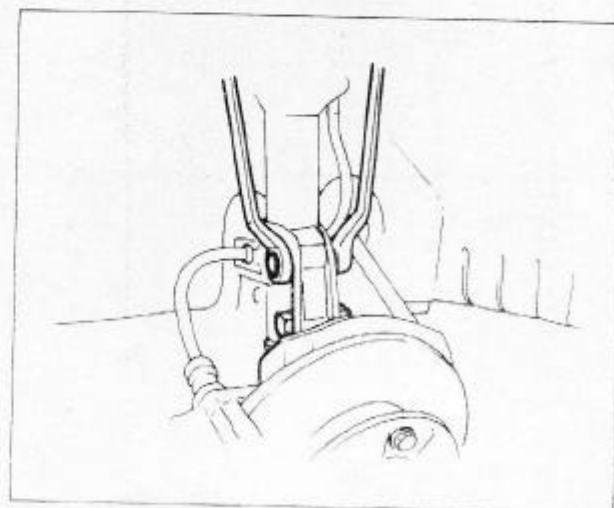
A — 93 DISCONNECTING THE UPPER BOLTS OF STRUT BRACKET
